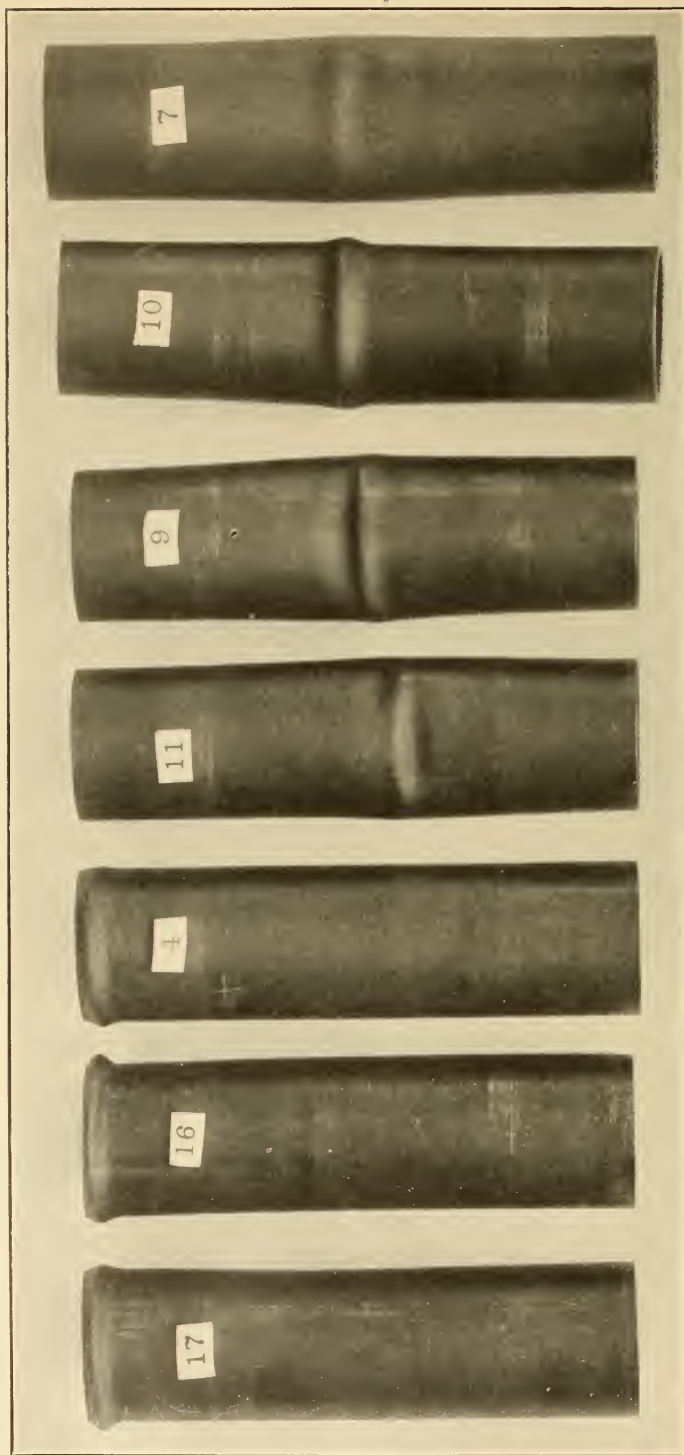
Typical failures of short compression specimens cut from each section of tubing.
